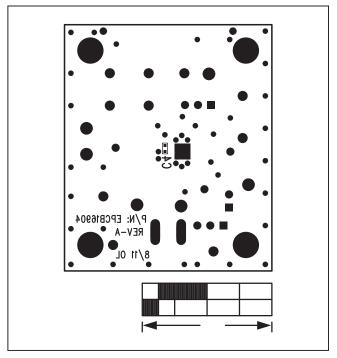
MAX16904 EV Kit Component Placement Guide—Solder Side
